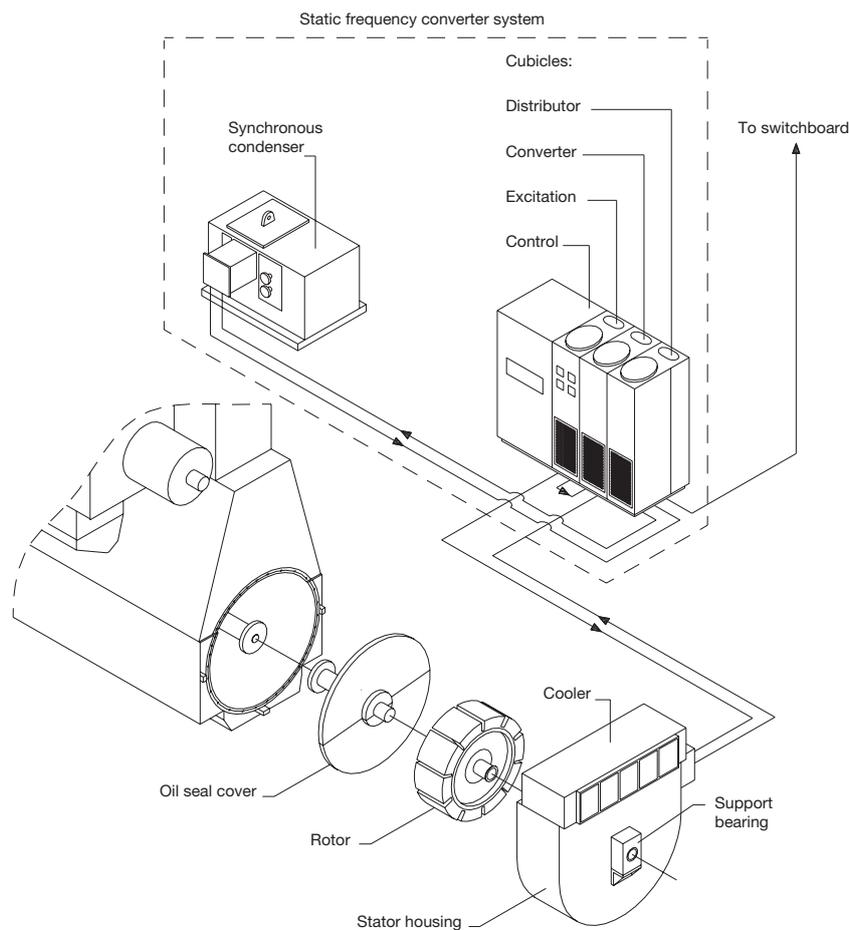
alternative 5, shows the DMG/CFE (Direct Mounted Generator/Constant Frequency Electrical) which is a low speed generator with its rotor mounted directly on the crankshaft and its stator bolted on to the frame box as shown in Figs. 4.03.04 and 4.03.05.
